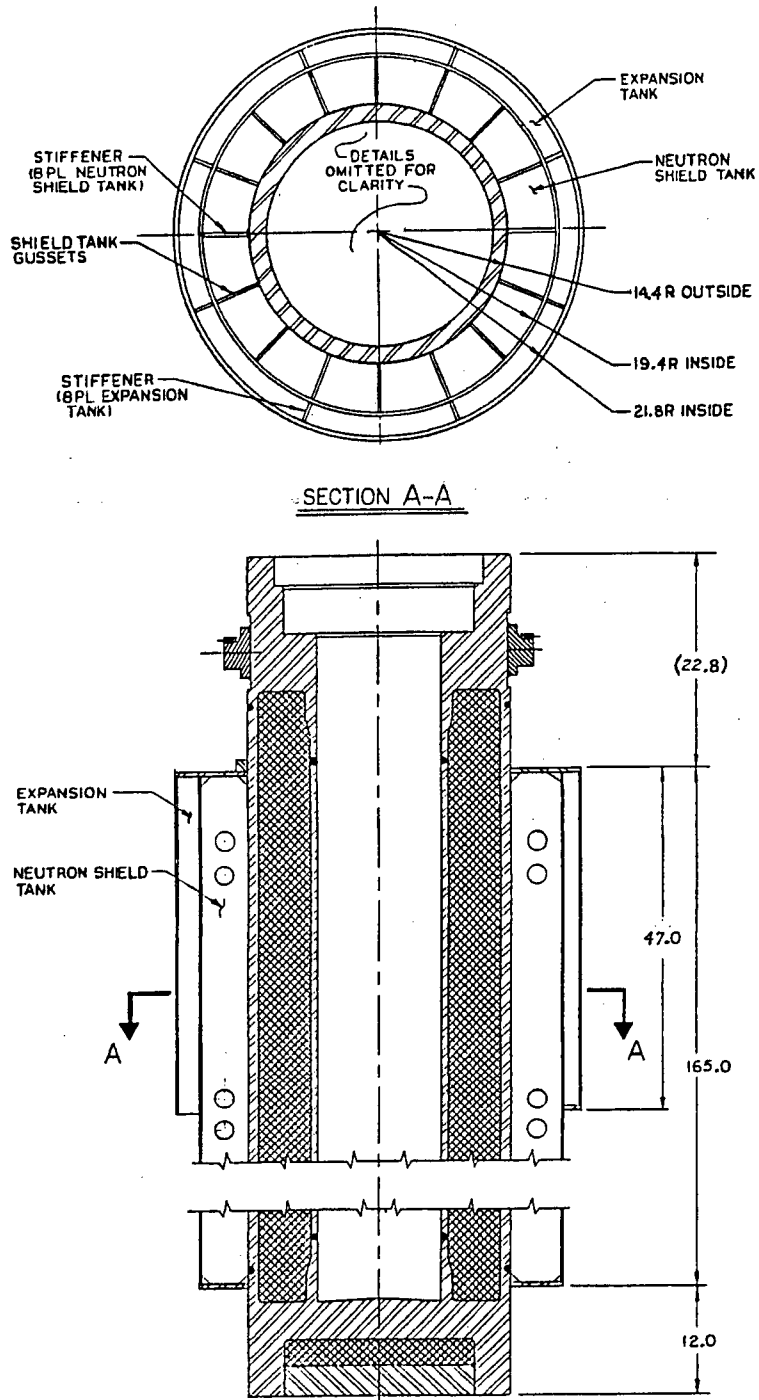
Component Parts of Shield Tank Structure
